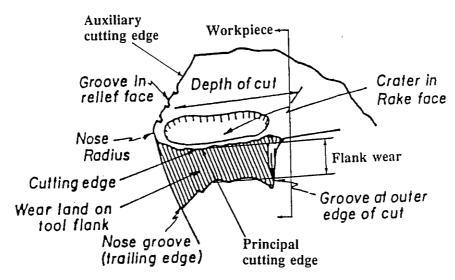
Magnified view of tool bit showing flank and crater wear [Tseng, 1979].
